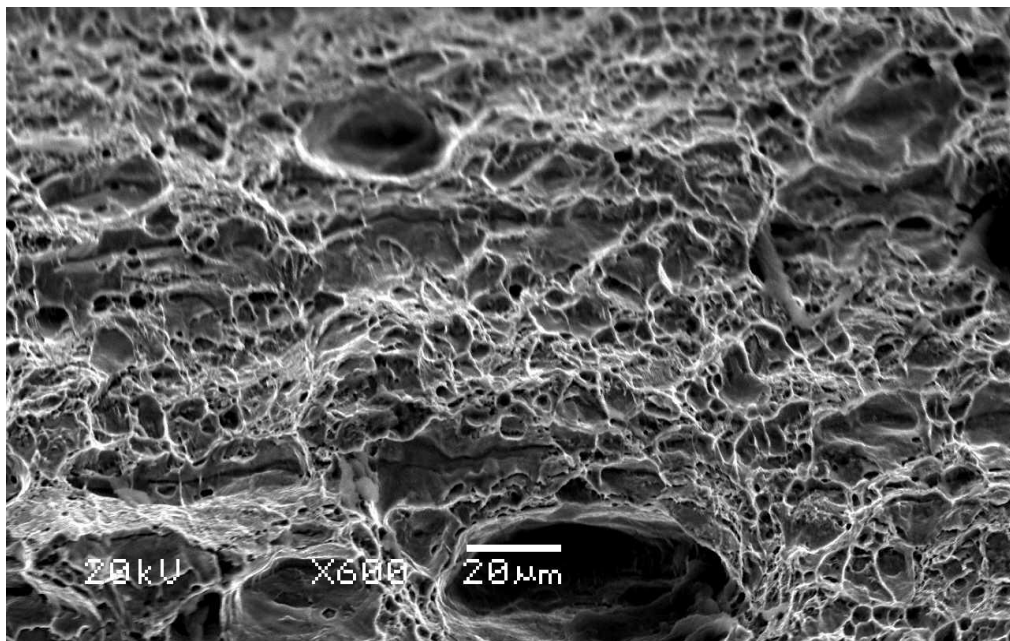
Ductile Fracture Surface (High Magnification)
